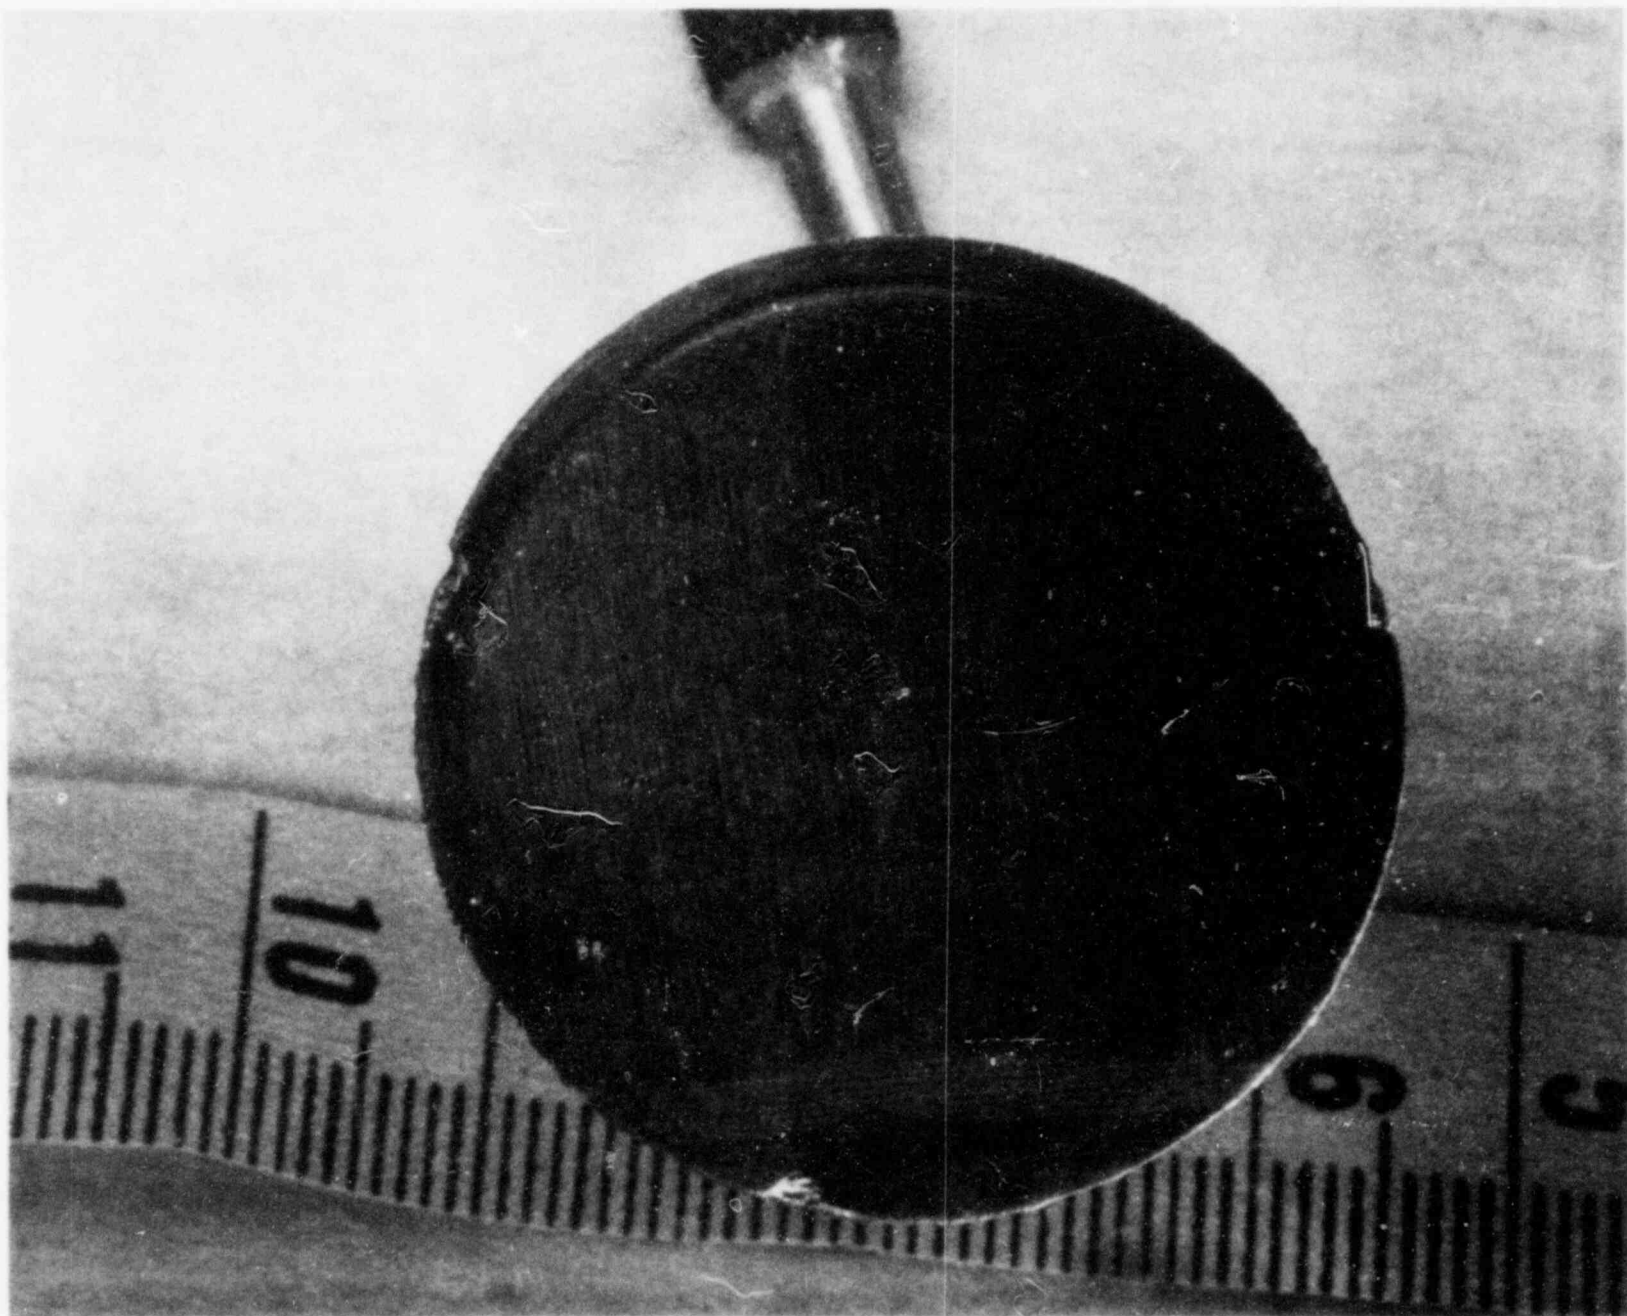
Photograph Showing Grinding on the Pipe Inner Surface
